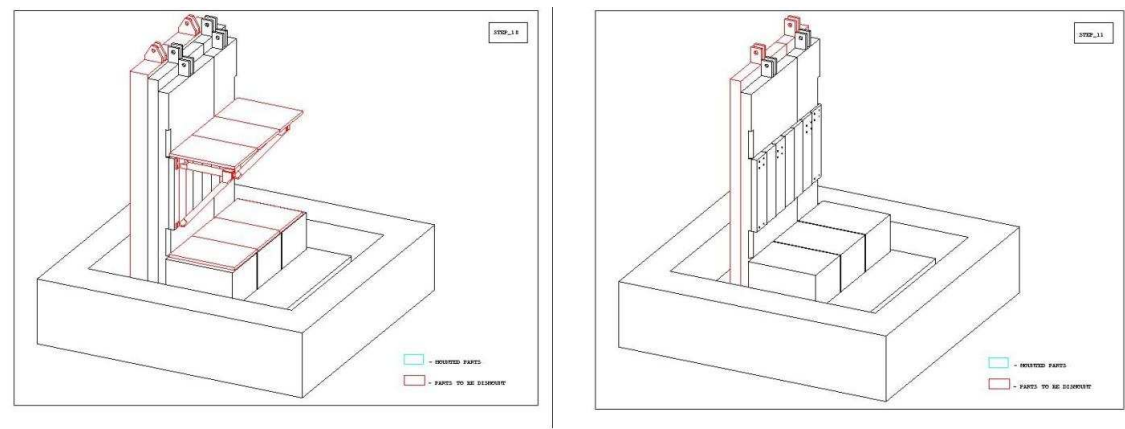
SM3 Analysis Magnet Assembly Steps 11 (left) and 12 (right)
